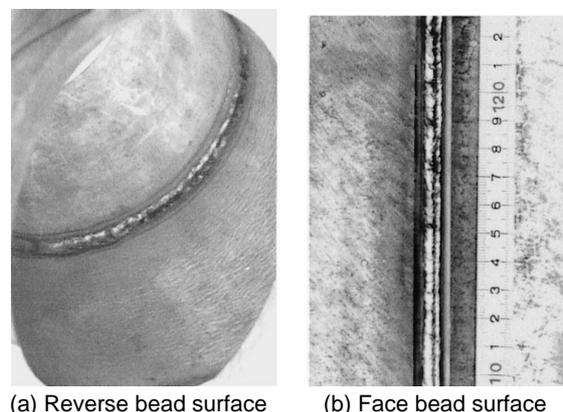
Glossy, regular bead appearance of the root pass weld of a 304-type stainless steel pipe welded with TGX-308L without back shielding
